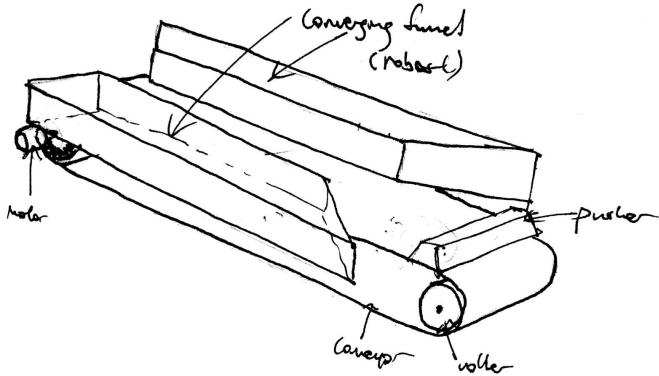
The selected box movement mechanism: the conveyor belt with pusher block
